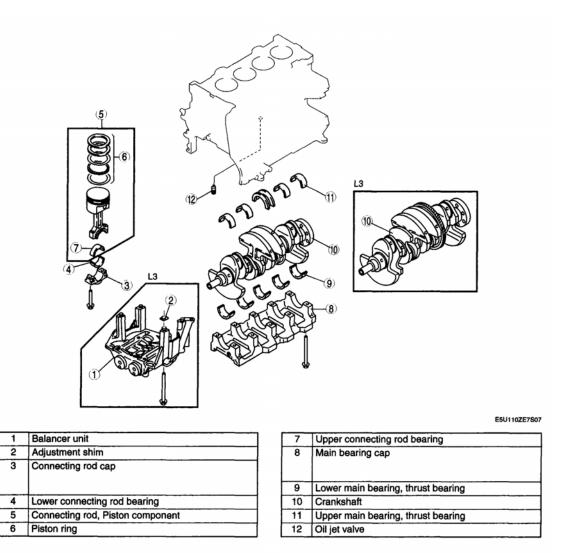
Exploded View Of Cylinder Block (II) Disassembly Courtesy of MAZDA MOTORS CORP.
